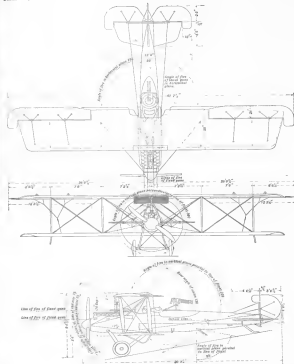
OUTLINE DRAWINGS OF MODEL G-2
